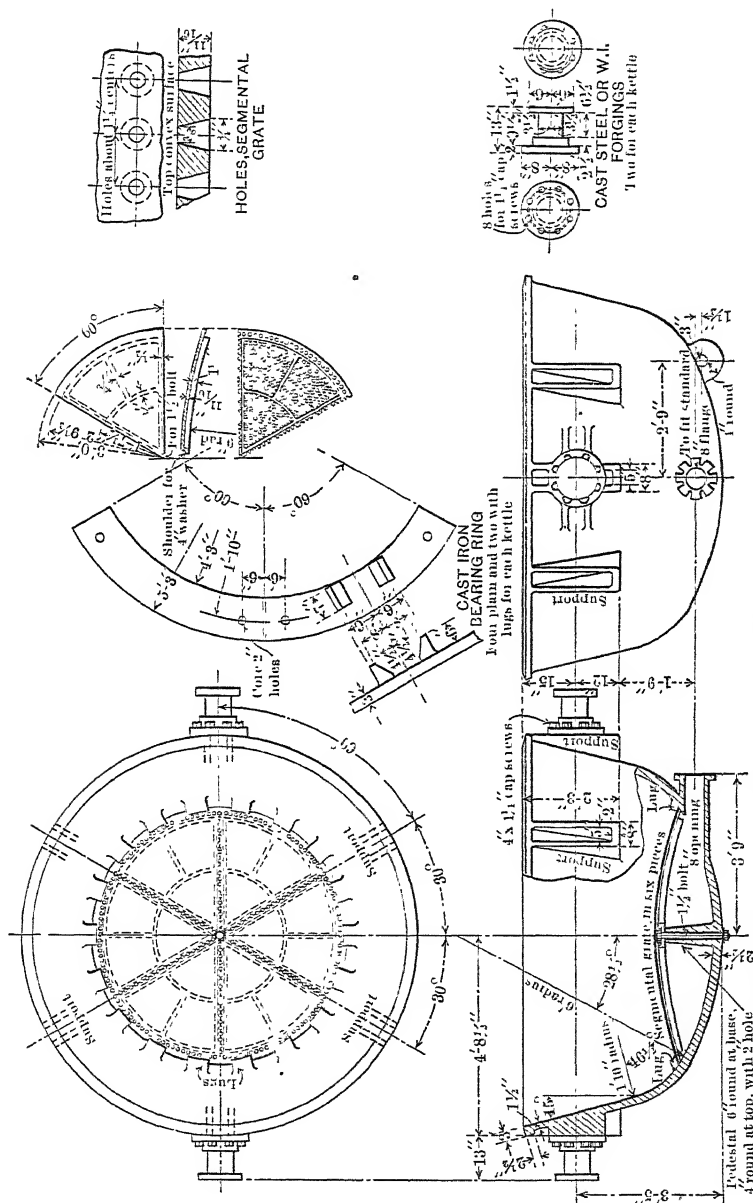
DETAILS OF CONSTRUCTION OF THE ROASTING-POT OF THE DETROIT COPPER MINING CO.
